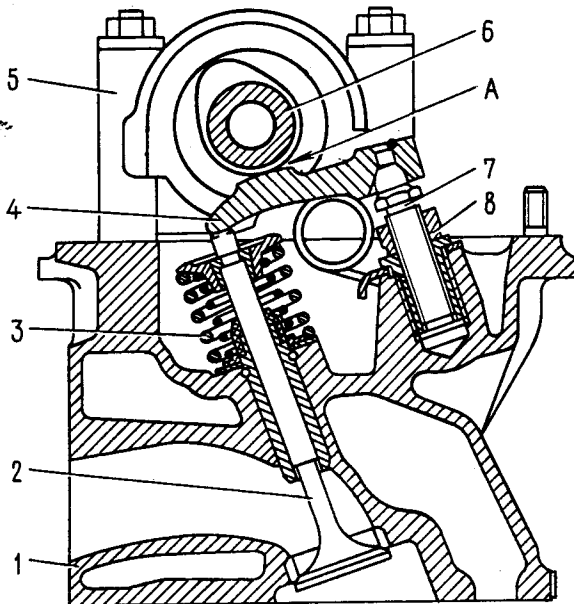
Cylinder Block and Head. Section Through Inlet Valve:
